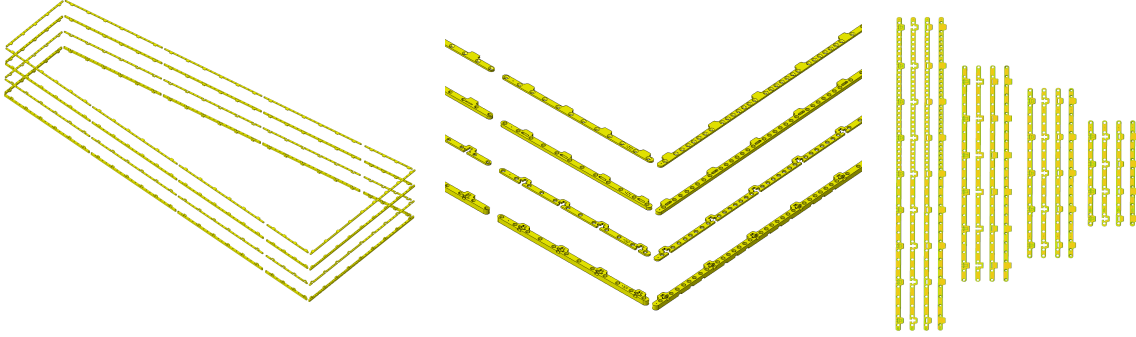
(left) Design[†] of the GE1/1 internal frames, (middle) magnified view of a section of the Figure 3.8, and (right) shapes and mechanical structure of the different pieces of the frames (right). Ten pieces are joined together to form each frame. The stacked frames surround the GEM foils along their periphery [17].
